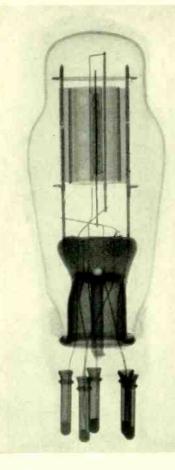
The filament and grid assembly of a completed vacuum tube can be inspected with x-rays
